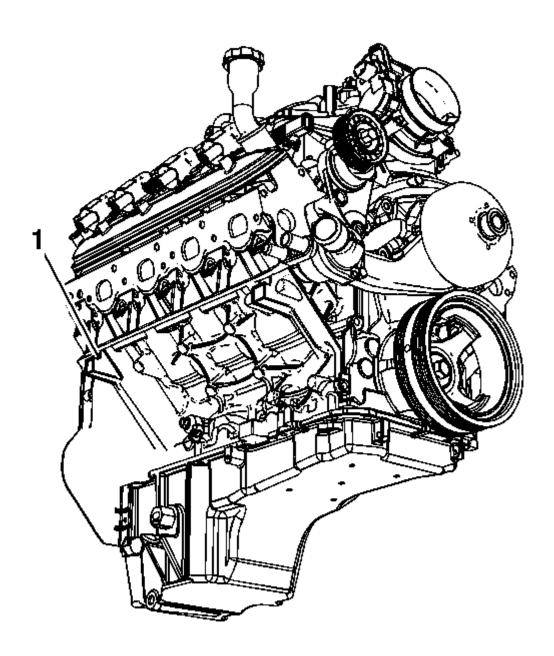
Locating Tab On Engine Block Courtesy of GENERAL MOTORS CORP.
